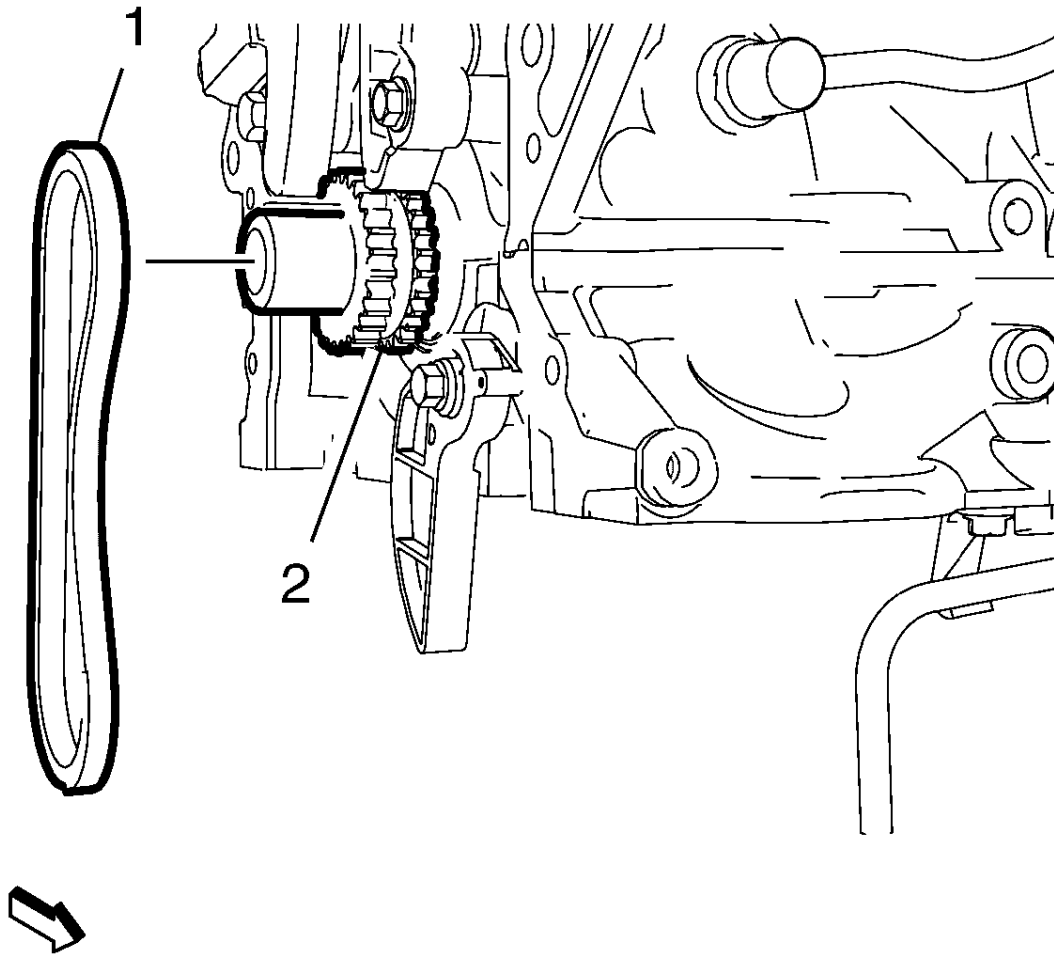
Oil Pump Drive Chain And Crankshaft Sprocket
